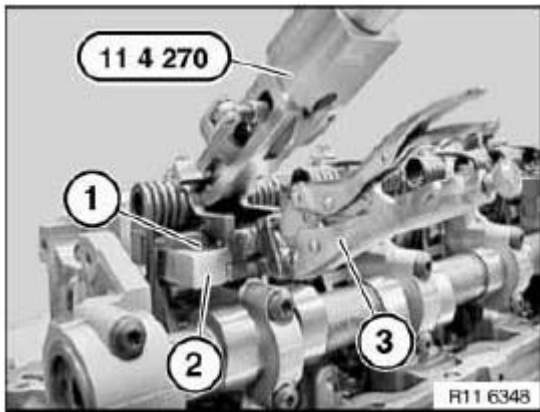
Identifying Special Tool (11 4 270), Gripping Pliers And Guide Block
